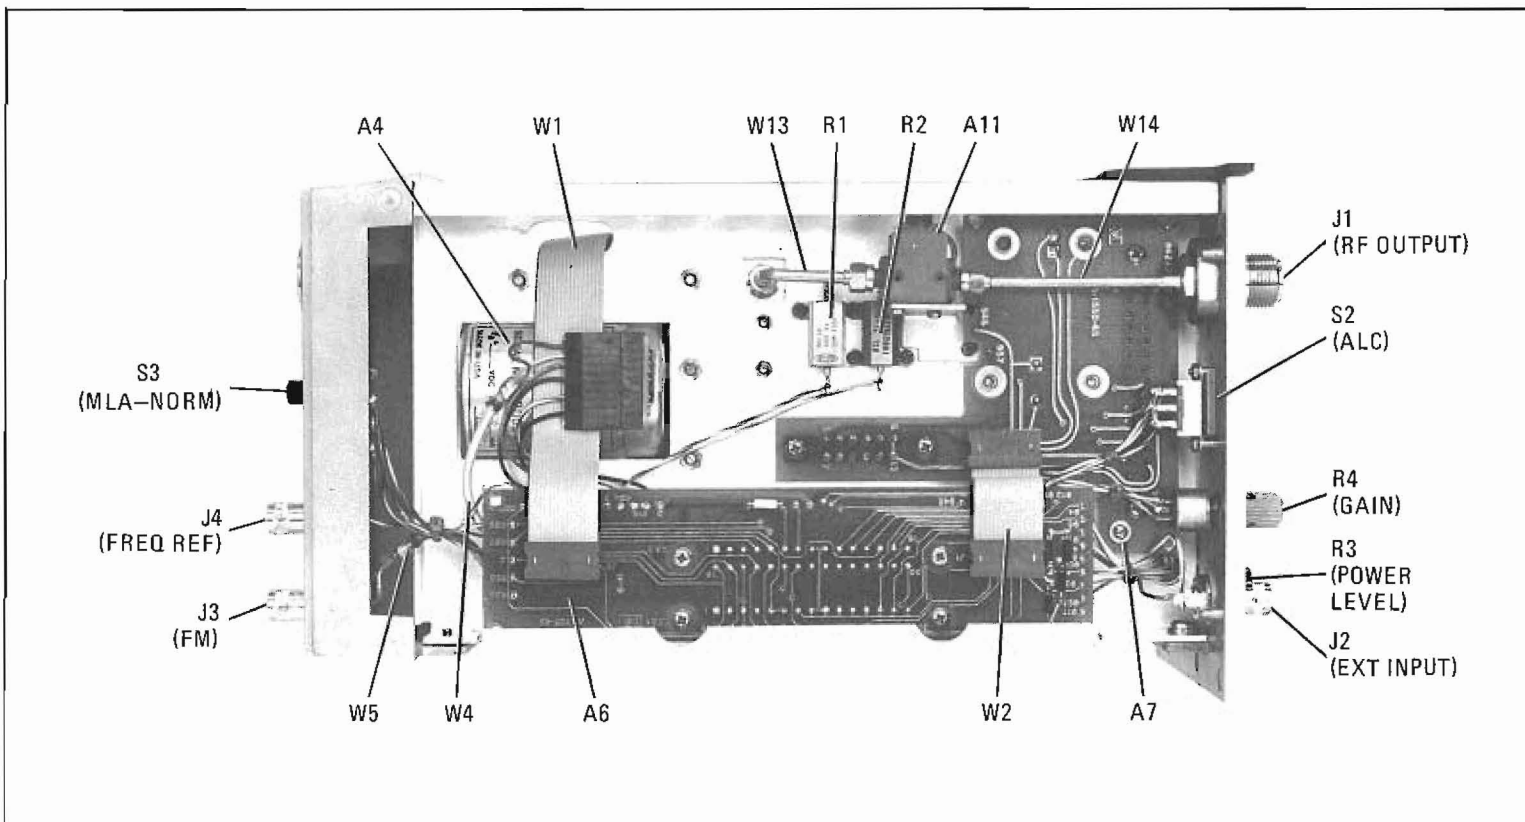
Major Assembly and Component Location, Bottom View, 86245A (Option 008)
